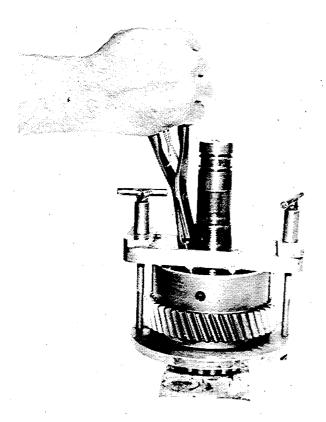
Compressing Clutch Piston Return Spring and Removing External Retaining Snap Ring.
